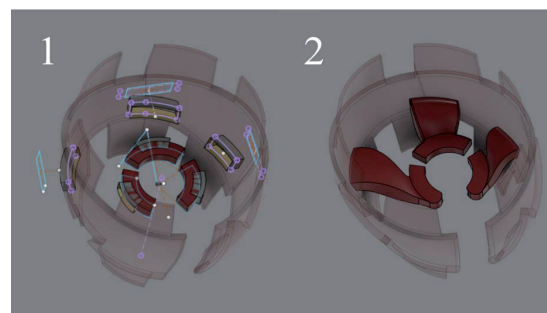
(1) Sketches of auxiliary surfaces and grip auxiliary surfaces. (2) Finished grip body attached to the cover surface.
